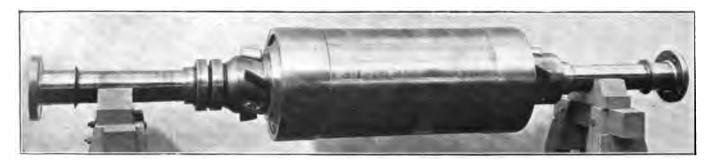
Complete Rotor of A. E. G. Turbo-Alternator
